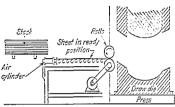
Roll feeder for feeding large sheets to drawing operations. (K. C. Butterfield.)
